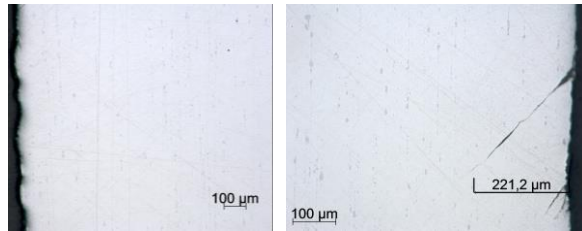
Optical microscopy for crack inspection at the left contact and the right contact
